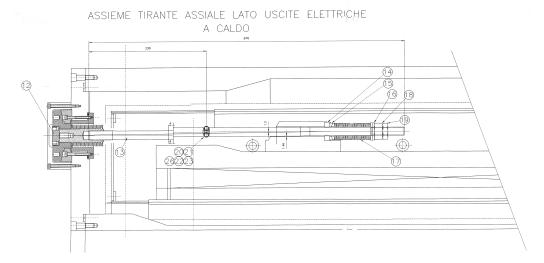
Original Ansaldo drawing: Axial Tie Rod Assembly
